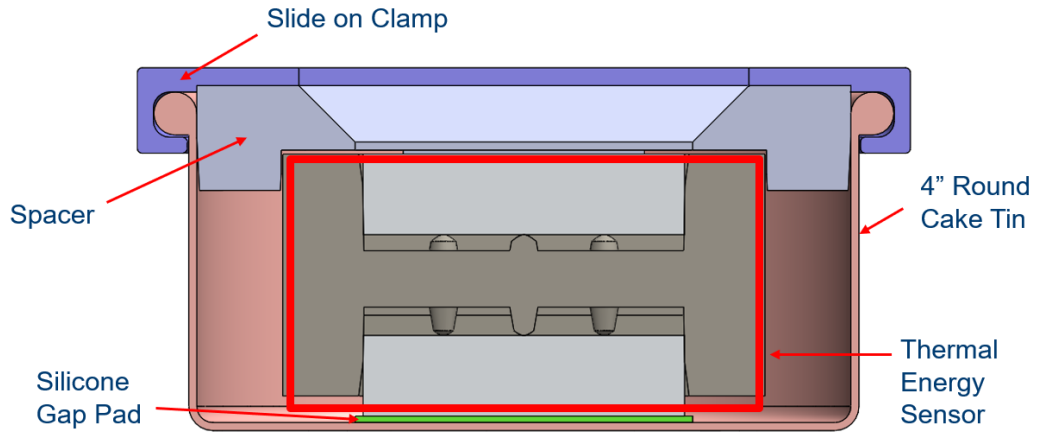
Cross sectional view of the thermal energy sensor assembled in a cake tin.
